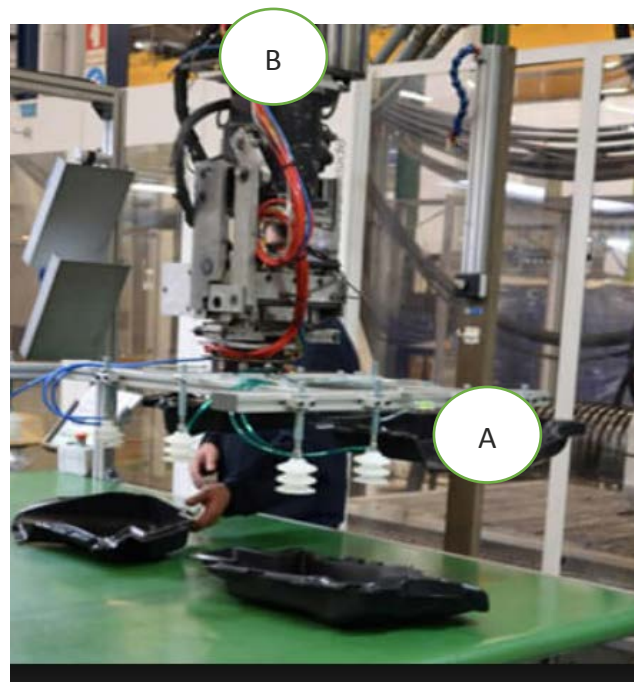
A) Headheld; B) Robot (Simoldes Robot)
